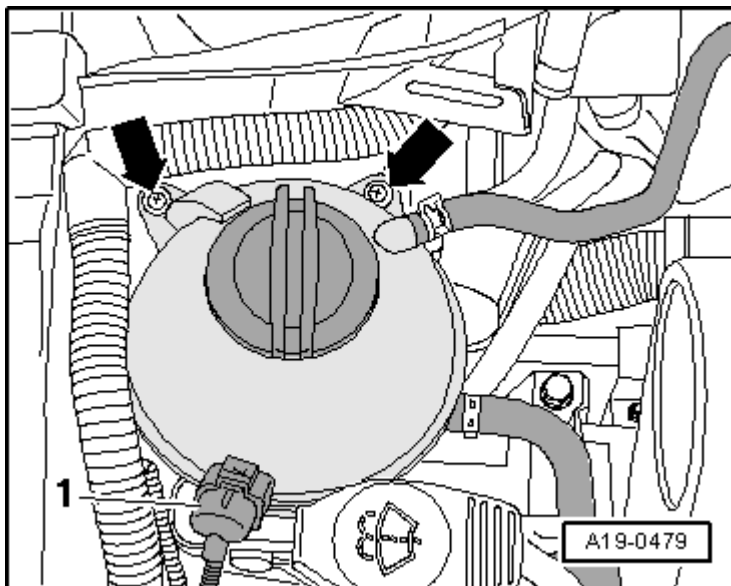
Identifying Coolant Reservoir Connector & Bolts
